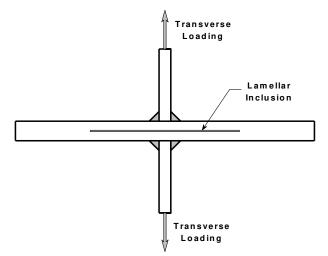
Lamellar tearing potential in a plate loaded in the through-thickness direction.
